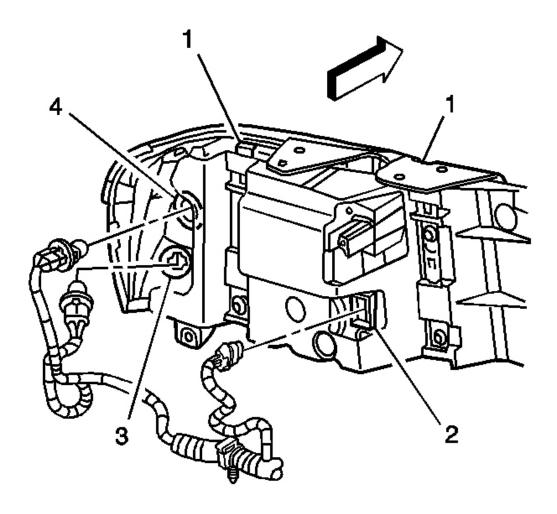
Identifying Retaining Tabs, Headlamp Electrical Connector, Side Marker Socket & Park/Turn Socket
